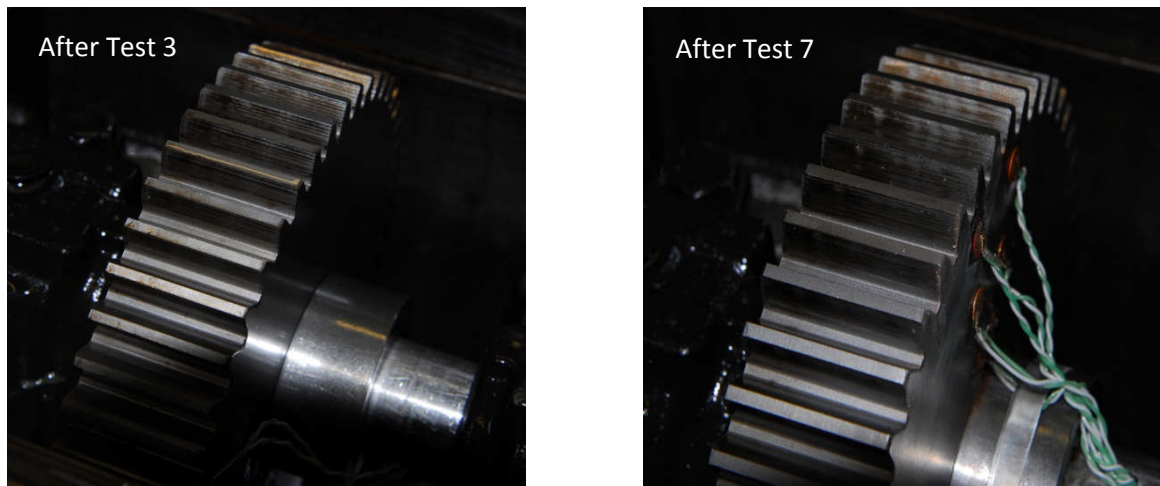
Undamaged gear with lubricious residue on teeth surface after Test 3 and Test 7
